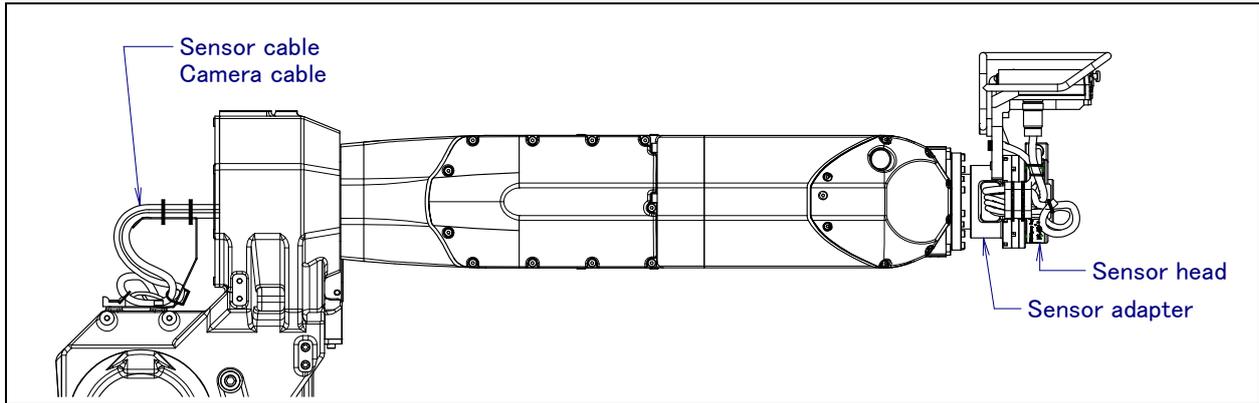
Replacing the 3D laser vision sensor head (Example of M-20iA)
